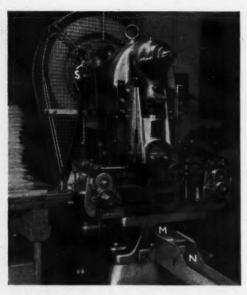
Blanks for the production of printing plates are cut on this Humphris 10-ton press, which is equipped with double roll feed units and an airoperated stacking attachment
